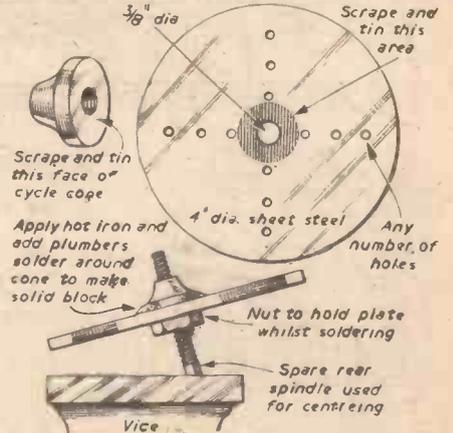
The method for soldering the cycle cone to the faceplate.
